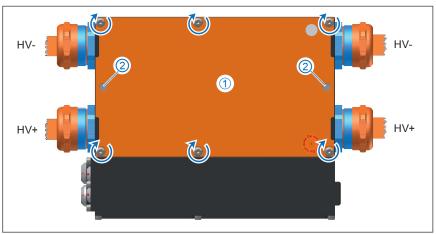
HV BM 1.2+S, HV power cables mounted, housing closed
